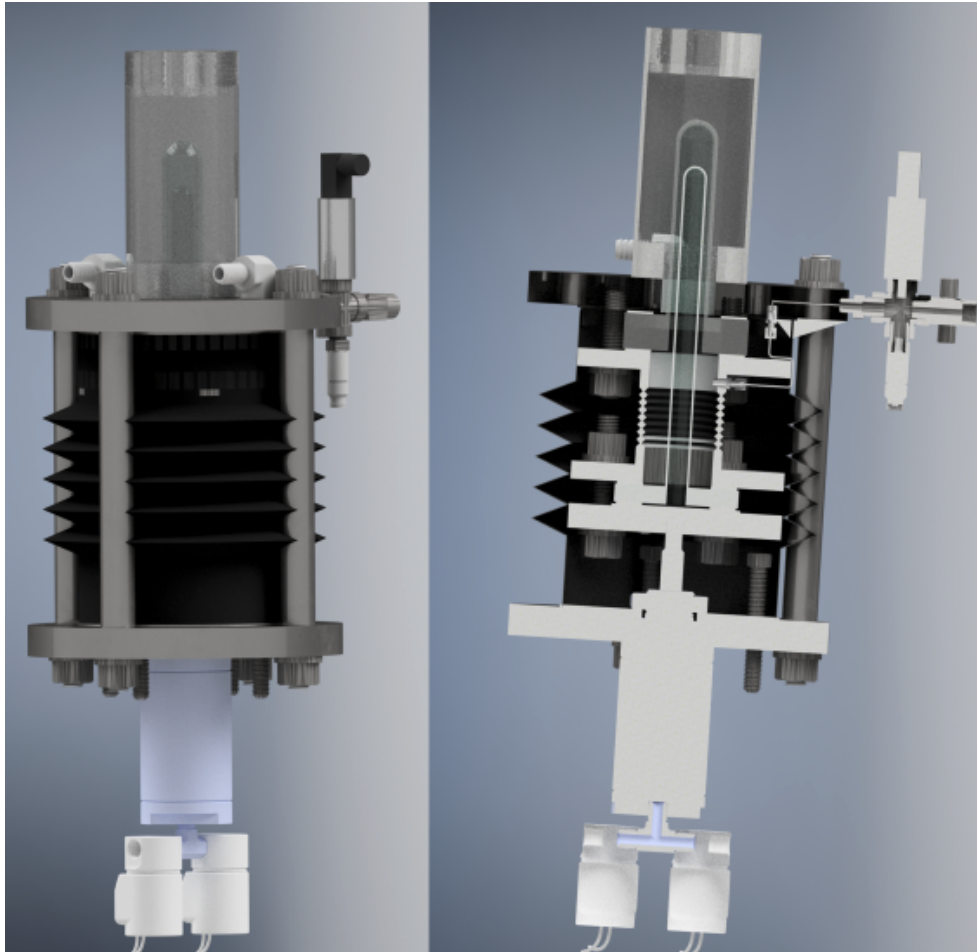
CAD rendering of GUNTER cross-section while expanded. Figure courtesy P. Jordan (private communication).
